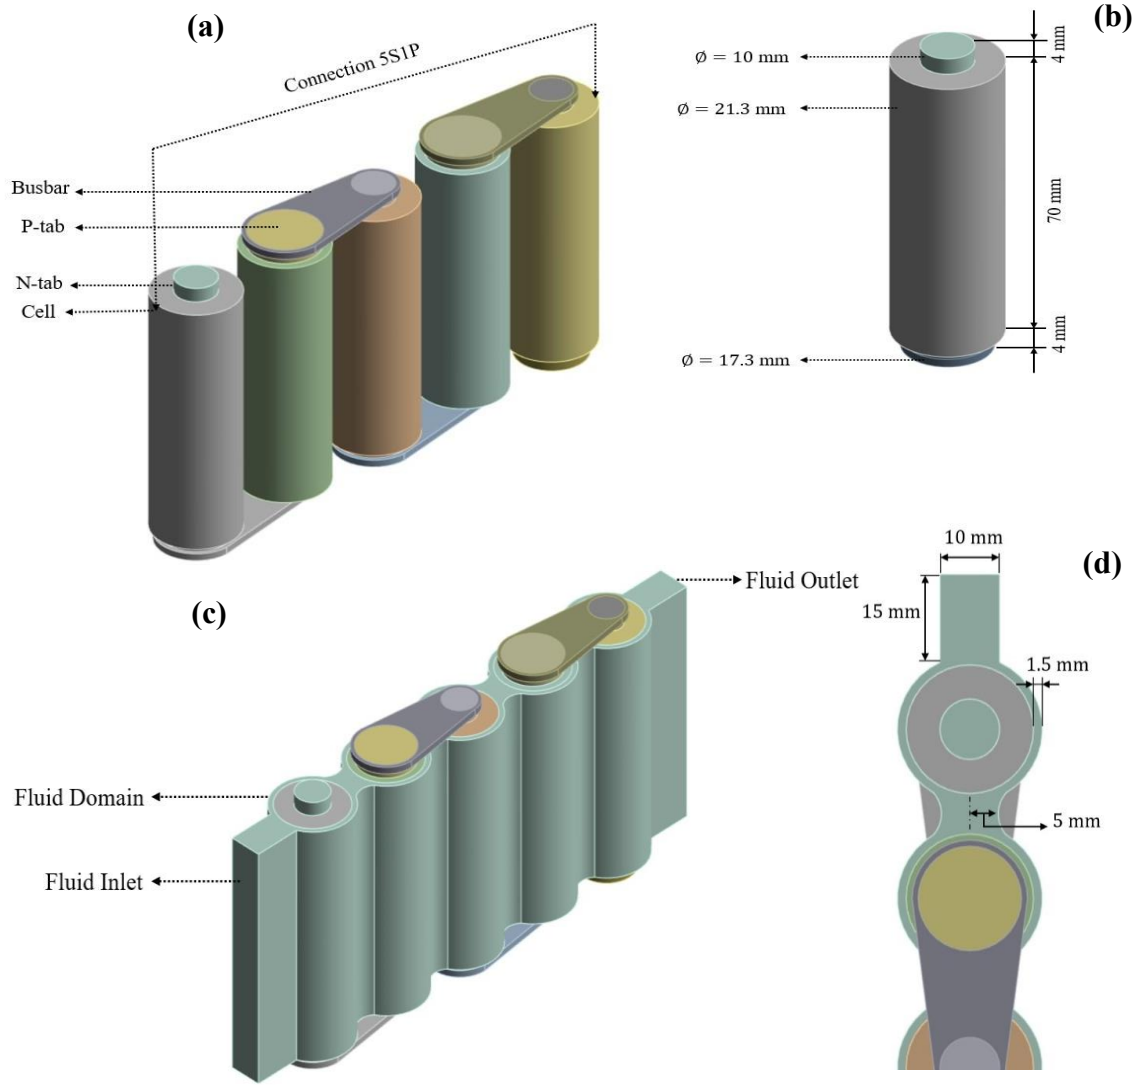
Schematic of the battery module (a) 5S1P arrangement, (b) single battery cell, (c) battery module with enclosure, and (d) top view of enclosure.
